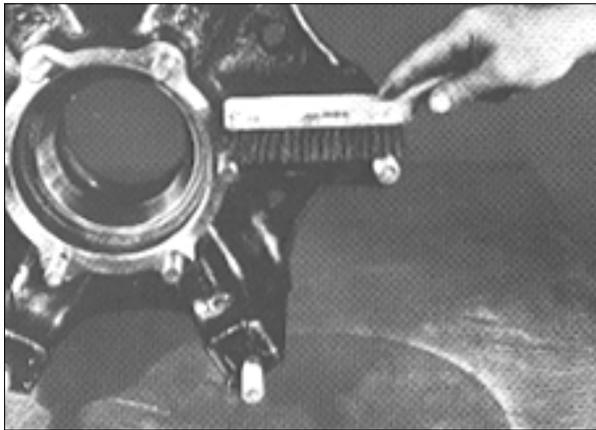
Mounting surface of the wheel is the inboard 28 degree taper on the spokes.
